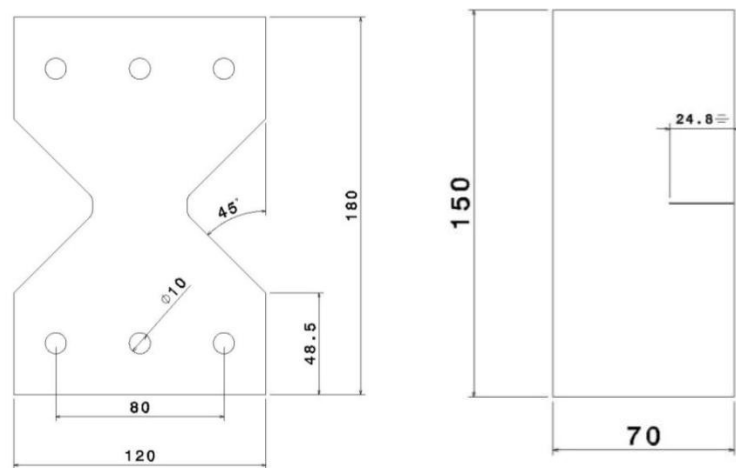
j. – (left): Arcan sample. (right) Edge notch sample. All the dimensions in dimension [mm]².
